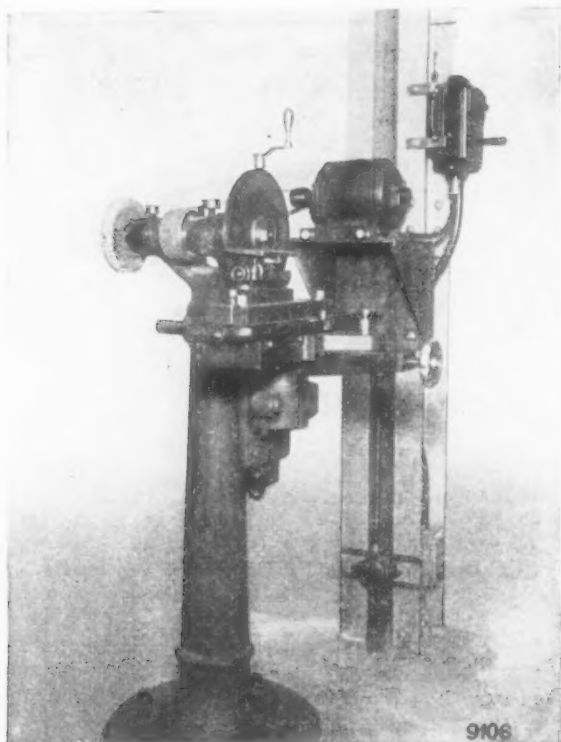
Lapping equipment with vertical disk. A horizontal disk arrangement may also be used.
